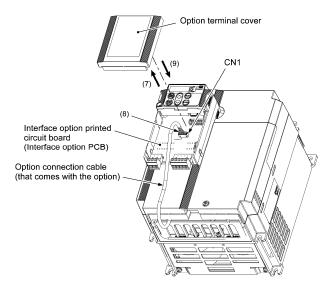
Connecting the Option Connection Cable to the Interface Option PCB
